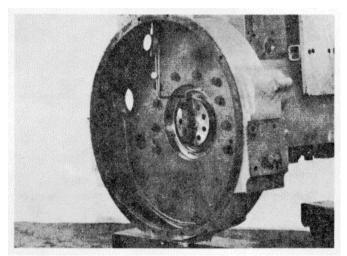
N-42. Use the Indicator to Check the Flywheel Housing Bore
